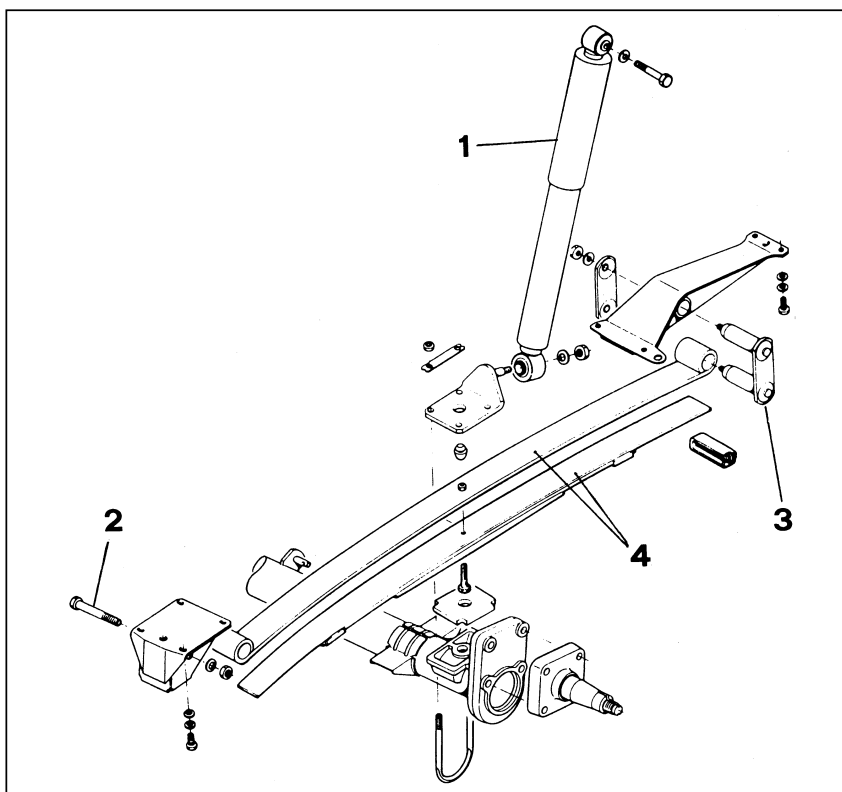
Rear axle suspension and control: 1 Shock absorber - 2 Front spring bolt - 3 Spring strap - 4 Leaf springs.
